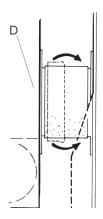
Mounting the operating springs on the hose reel drum
